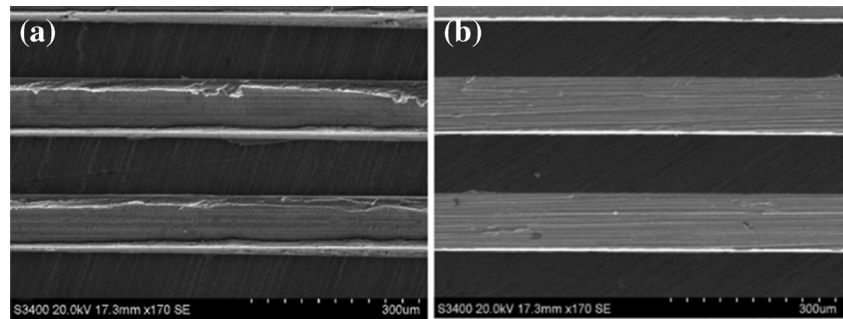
The copper grating machined by a a previous PCD micro end-milling tool and b the self-developed PCD micro cutting tool
